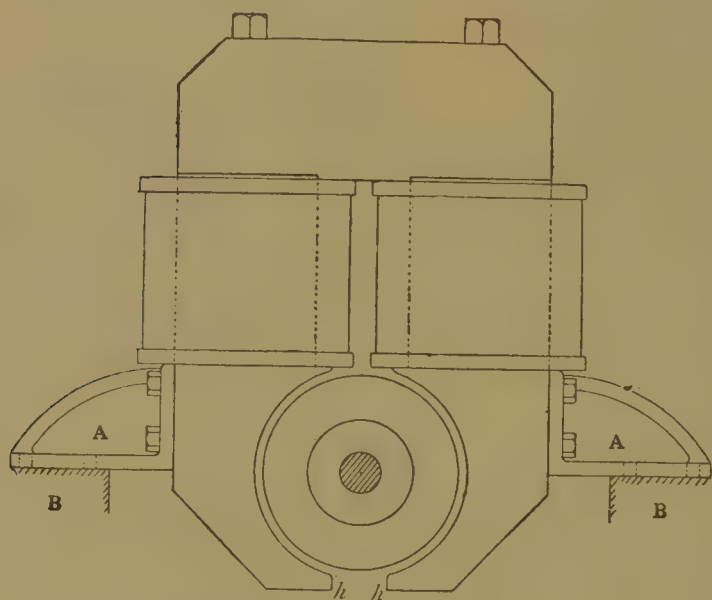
Magnetic Circuit of an Undertype Machine.
